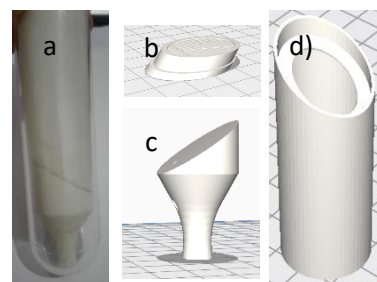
Several views of the modular device a) Side view of printed device; Cura view of b) membrane support part, c) module support part and d) Module part.
